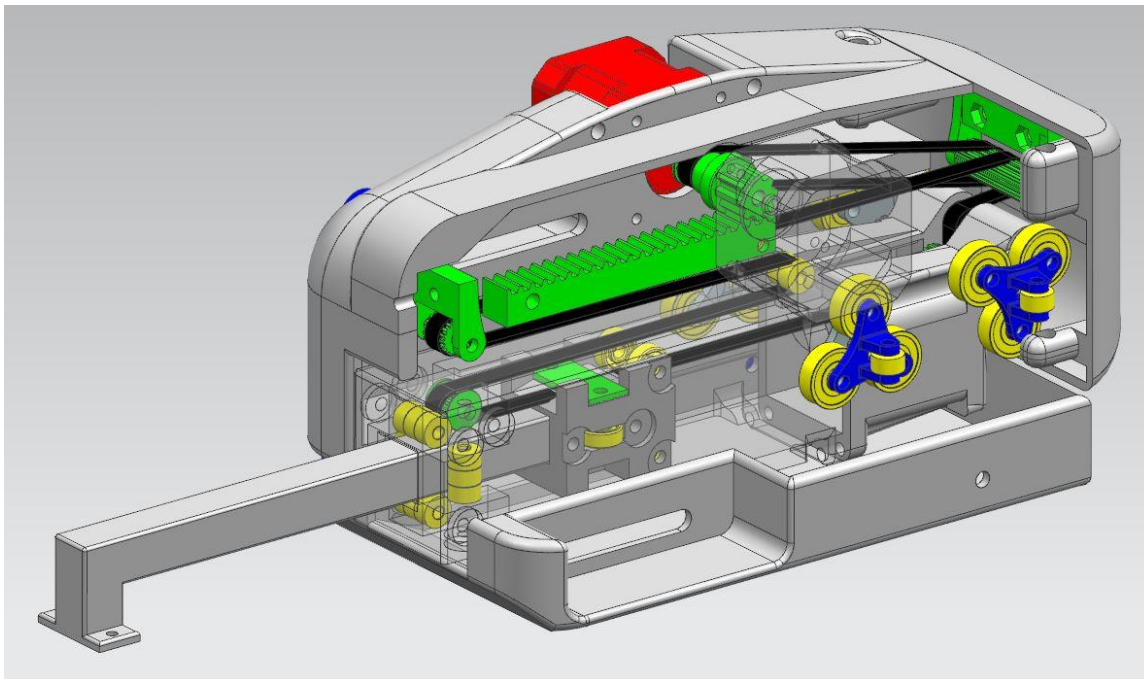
The Cartesian manipulator concept designed in CAD-software. The closest of the two outer body parts reveal the interior. Bearings of different qualities are shown in yellow; printed brackets in blue; printed drive-related parts in green; motor in red; tooth-belts in black; bigger printed parts in grey. Screws, nuts and rods are not shown. The belts were tensioned with screws and nuts.
